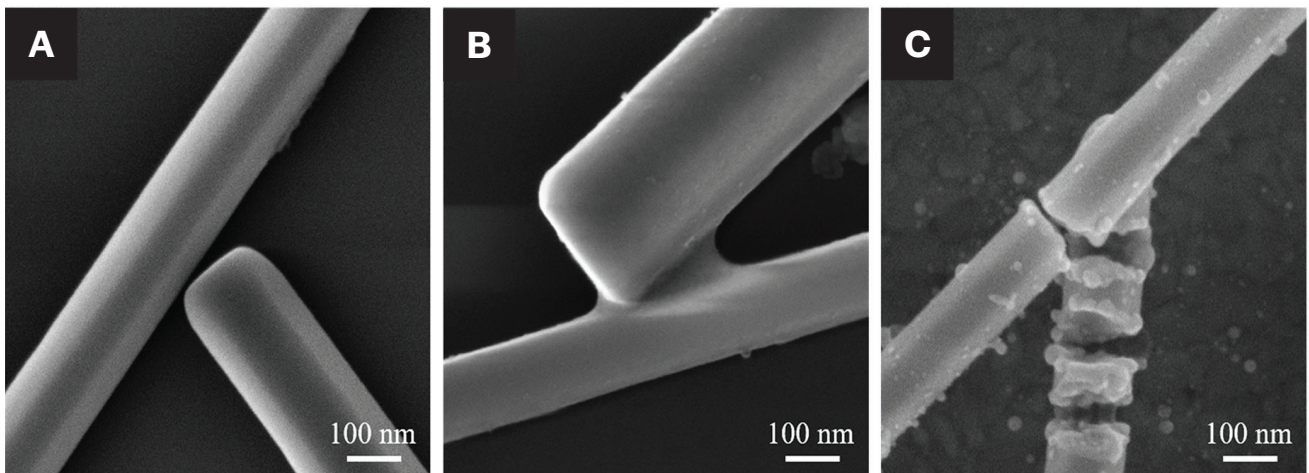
Laser joining of ZnO nanowires: A — Before welding; B — successfully welded nanowires; C — over-welding caused by excessive energy density (Ref. 28).
